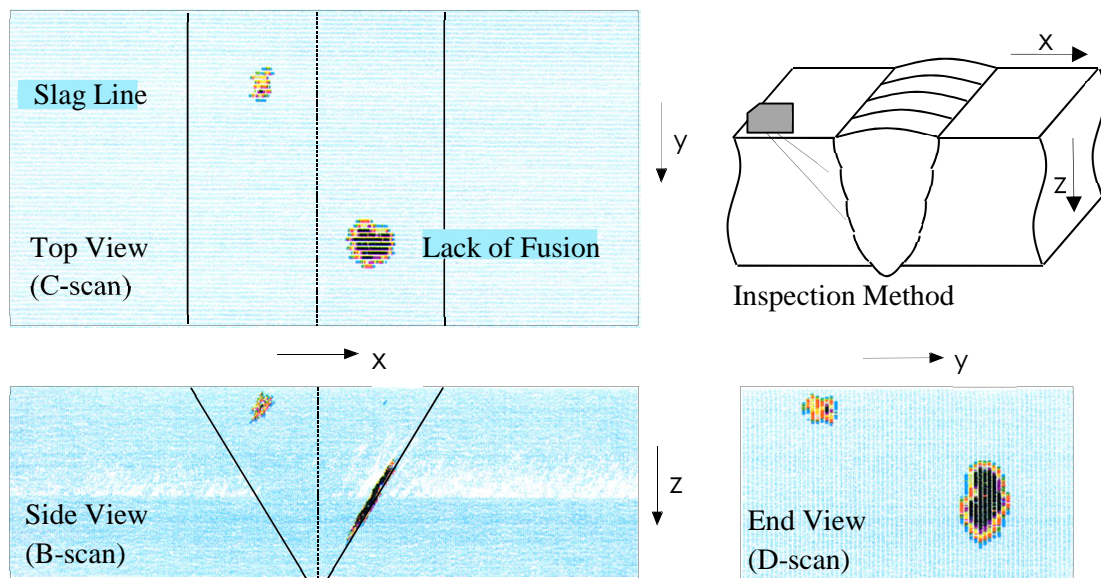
Imaging Basics of Pipe Weld Defects.
